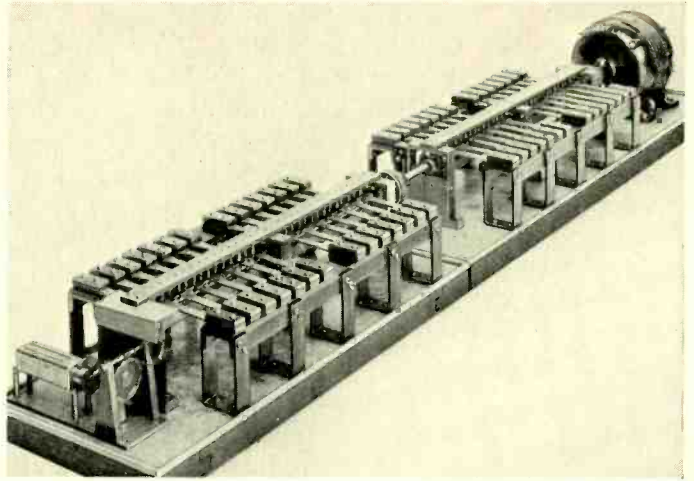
An early type of fatigue test flexed sections of cable sheath back and forth till failure occurred
